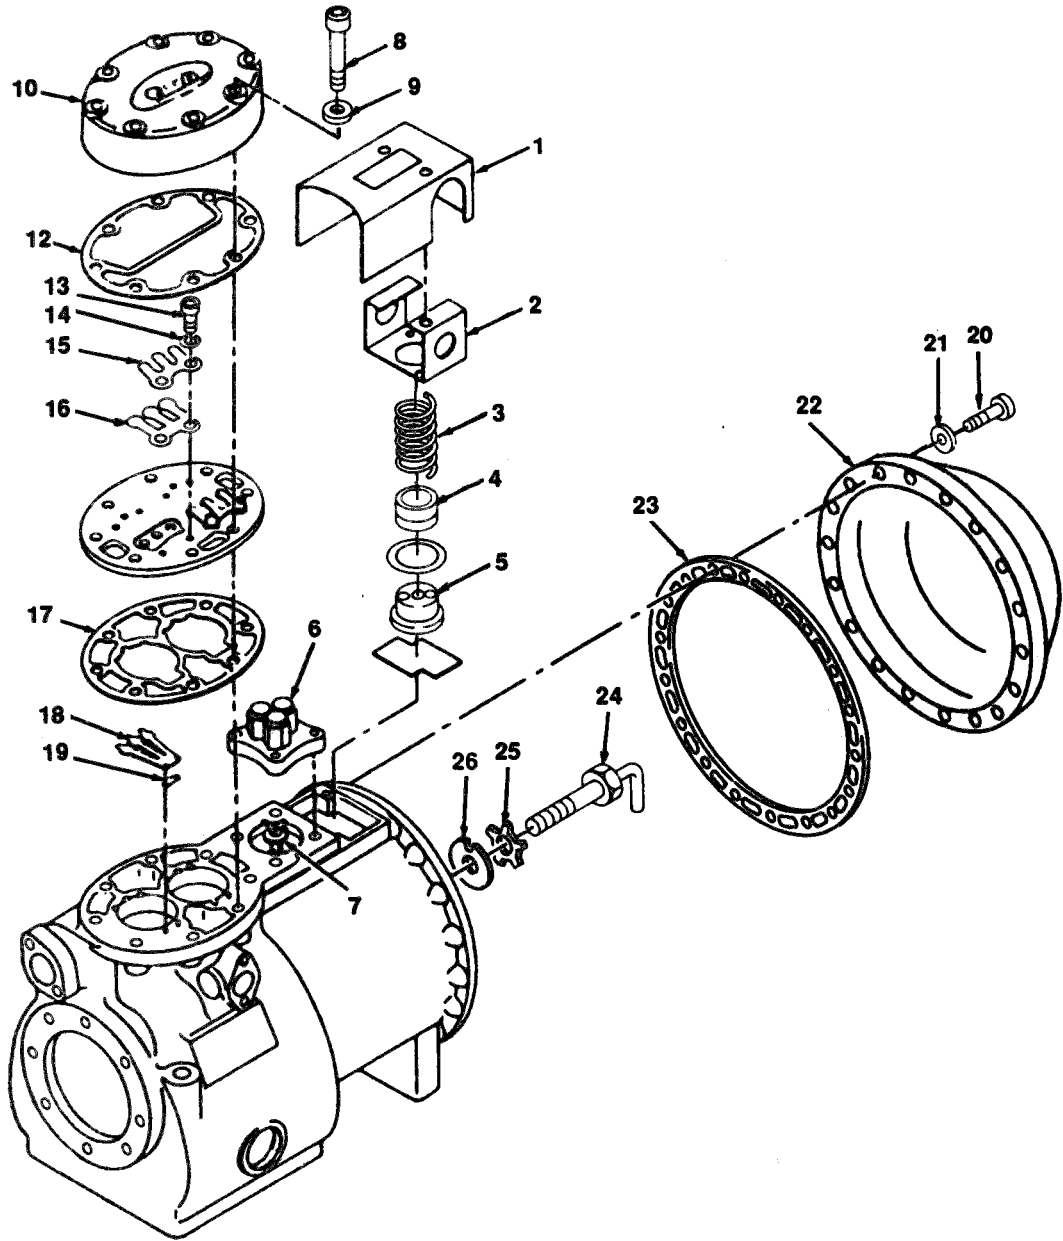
Motor and Compressor Assembly (Sheet 1 of 2).
